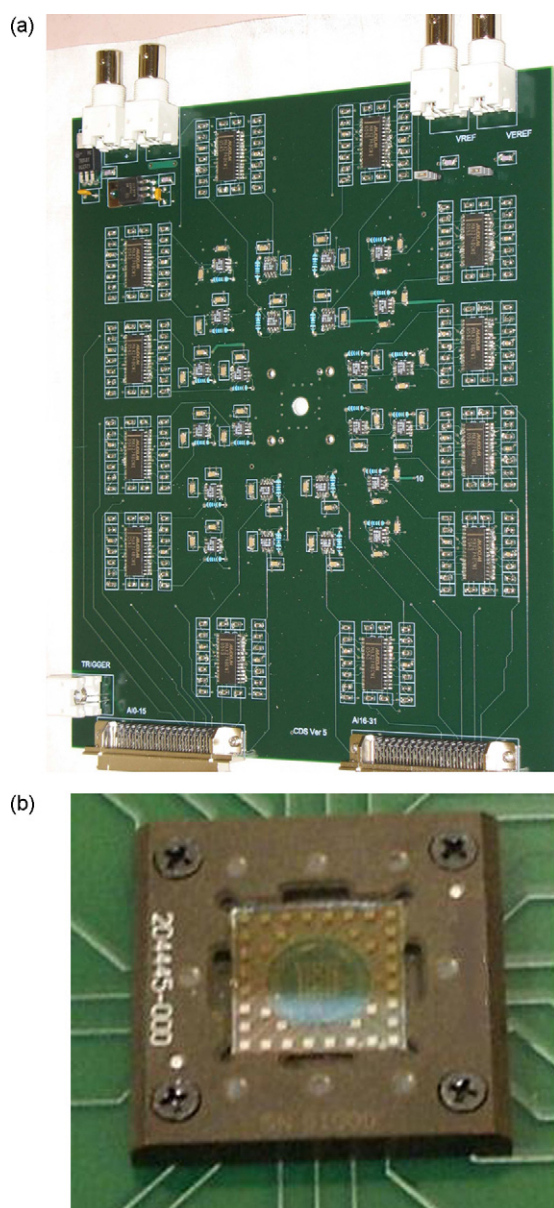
Printed circuit board electronics and the socket which mounts on the underside. A hole in the center of the printed circuit board allows access to the microchip. (a) Printed circuit board electronics. (b) Microchip sitting inside the socket. Clamshell-lid is not shown. The O-ring, which provides a seal, is visible under the microchip. Note that the microchip is upside down.
